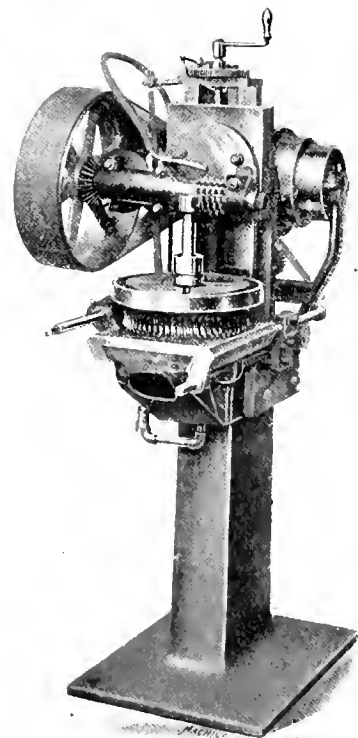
Simple Spur Gear Hobbing Machine made by the Adams Co., Dubuque, Iowa.
